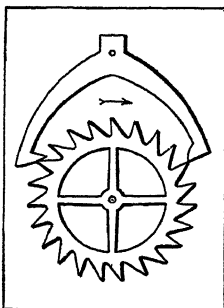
ANCHOR OR RECOIL ESCAPEMENT, ONE OF THE EARLIEST ATTEMPTS TO USE A PENDULUM
